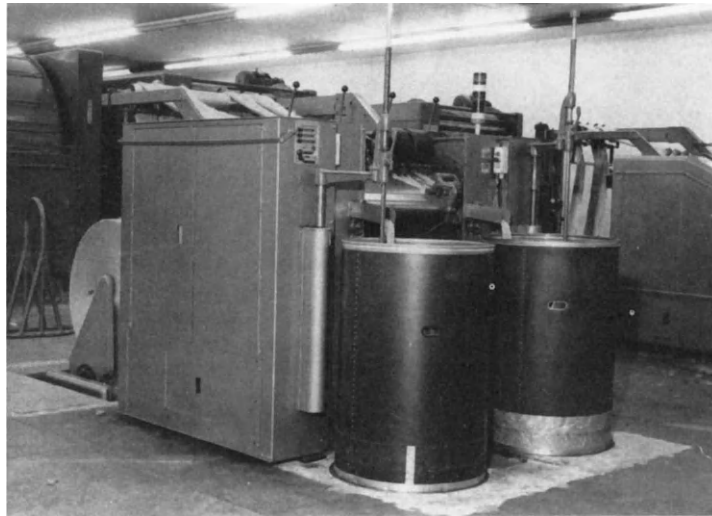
Jute first drawing frame. The creel at the back of the machine feeds four rolls of finisher card sliver into separate drafting zones using faller pin control. Two lots of two slivers each are front-doubled by a sliver plate and crimped before delivery into the two reciprocating cans, each fitted with a tramping motion to pack as much as
